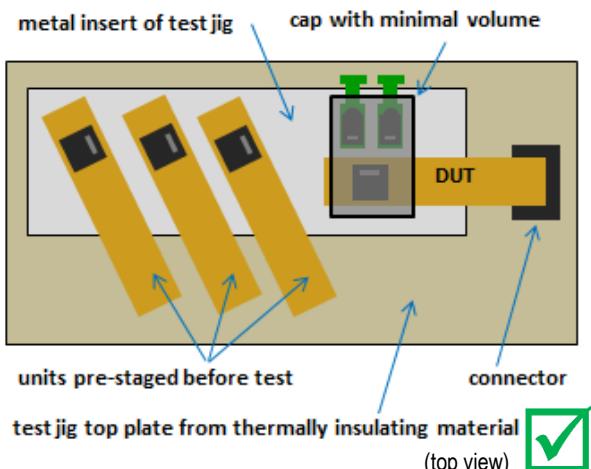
Good example of test jig top plate from thermally insulating material (e.g. plastic), preventing the operator to easily touch the metal insert of the test jig. The metal insert is large enough to provide space for pre-staging several units before test, allowing the units to adjust to the temperature of the jig.
